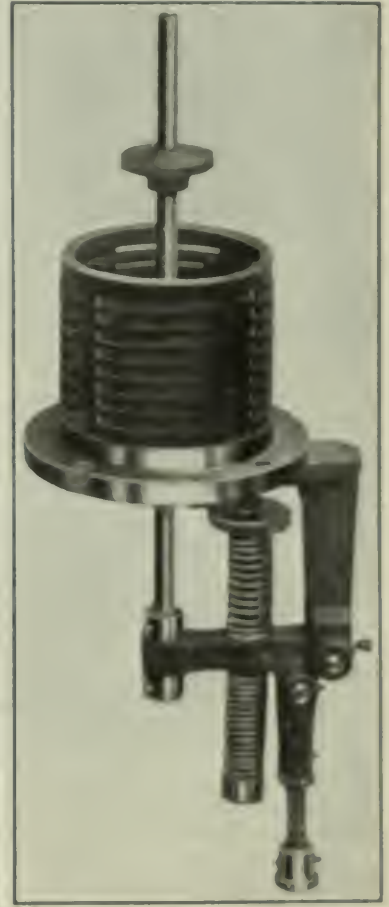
VALVE CAGE AND REGULATING CAGE.
